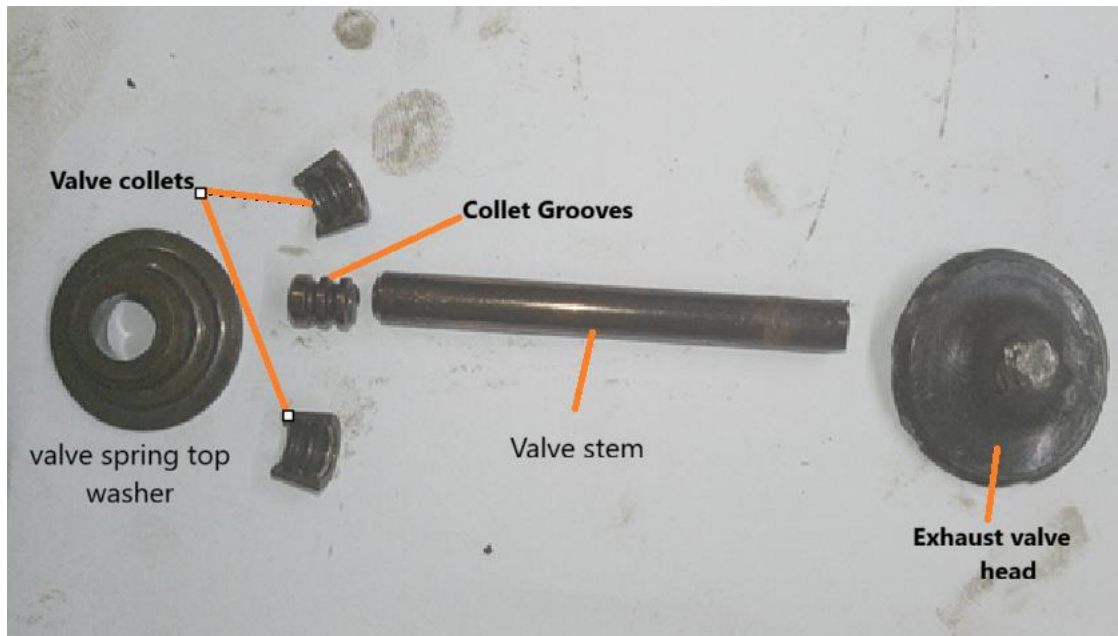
Exhaust valve broke into three parts. (Source: AMO)
